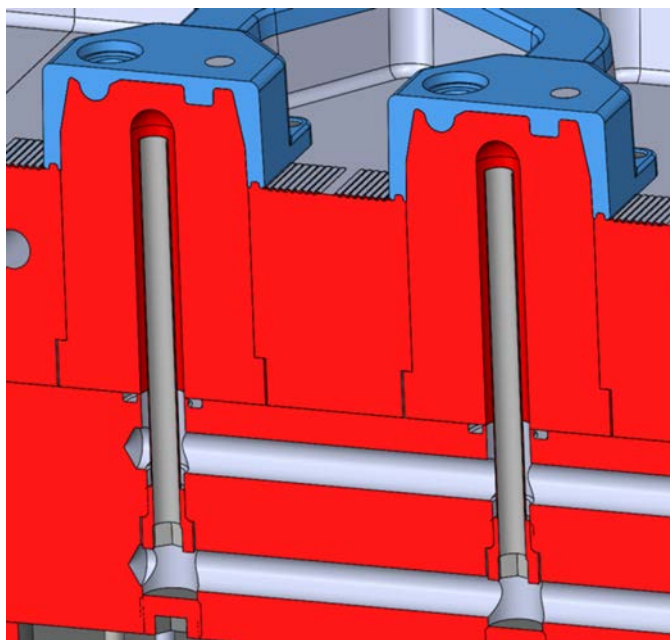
Traditional system of thermostating applied to the cores of mold; at the cross-section of two cavities of the mold, there were marked the castings together with the gating system (blue colour)
